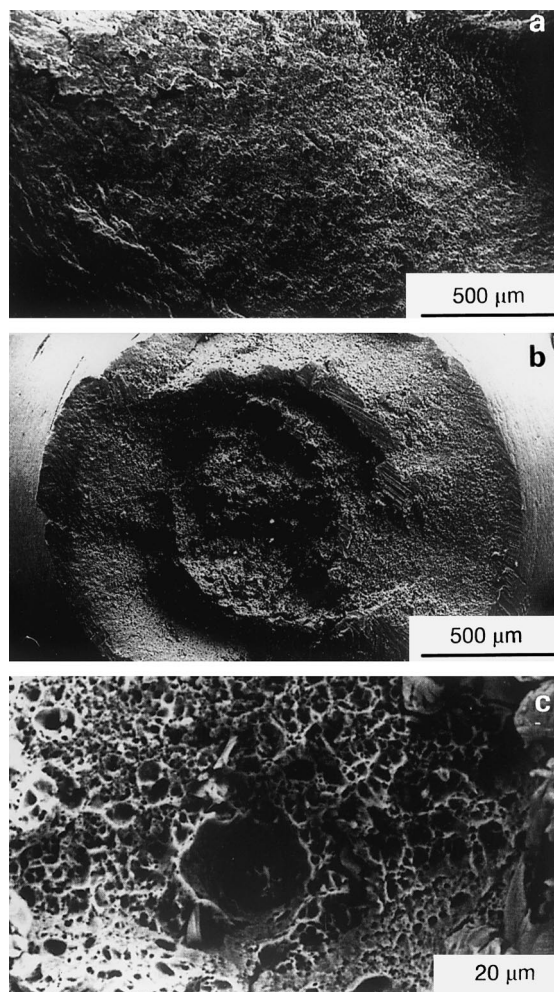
SEM fractographs of the fracture surfaces of fatigue tested CuAl-25 at 22°C in (a) unirradiated ($N_f = 262$), (b) irradiated (47°C, 0.3 dpa, $N_f = 129$) conditions, and (c) Same as (b), but at a higher magnification showing a large amount of plasticity-induced deformation voids.
